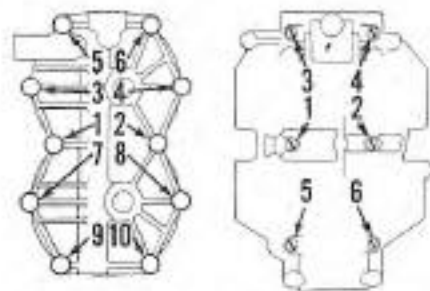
On Fleet Scott motors tighten the cylinder head screws to a torque of 80 inch pounds in the sequence shown in the left view. Tighten the crankcase main bearing screws to a torque of 80-90 inch pounds in the sequence shown in the right view, then tighten the flange screws to a torque of 70 inch pounds.
